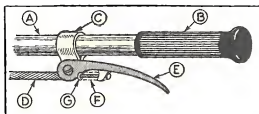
(A) Handlebar. (B) Handlebar grip. (C) Control lever supporting lug. (D) Control cable housing. (E) Control lever pulled up to expose control cable (F), over which rubber tubing designated by dotted lines, is slipped for protection. (G) Lug to which rubber tubing is taped to hold it snugly against control arm.
